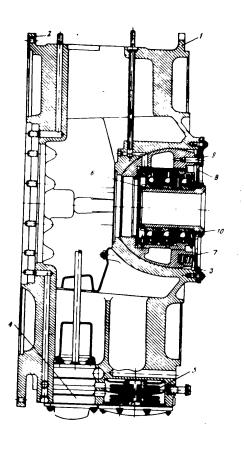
Front Three-Row Ball Bearing In Accessory Drive Power Take-off Housing
